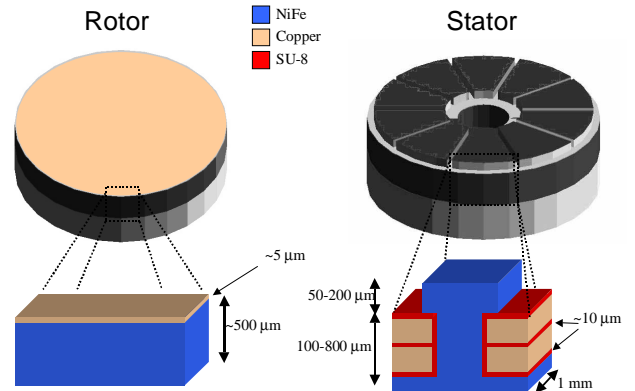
Rotor and stator of a typical MEMS magnetic induction machine, with approximate design dimensions; end-turns not shown.
